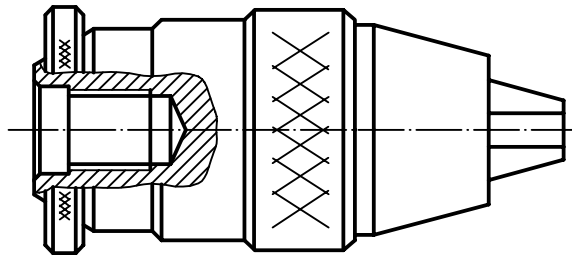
Three-jaw drill chuck — Internal thread mount type
